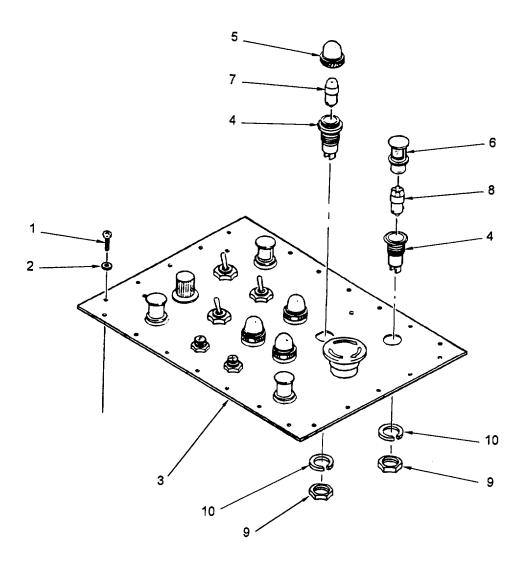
Control Panel Lamp/Panel Light Assembly Replacement
